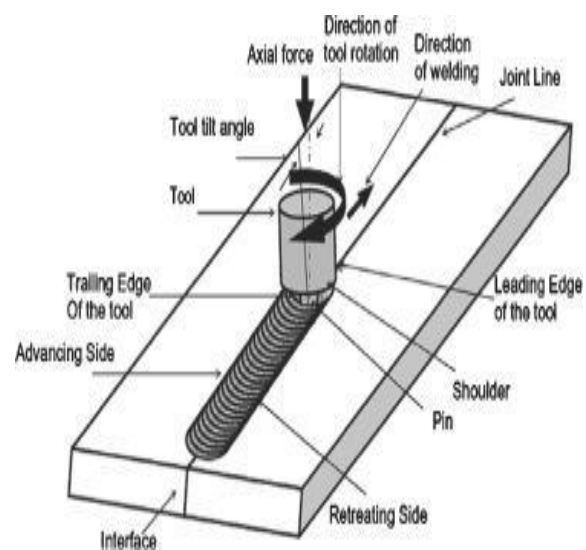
Schematic diagram of Friction Stir Welding [21].
